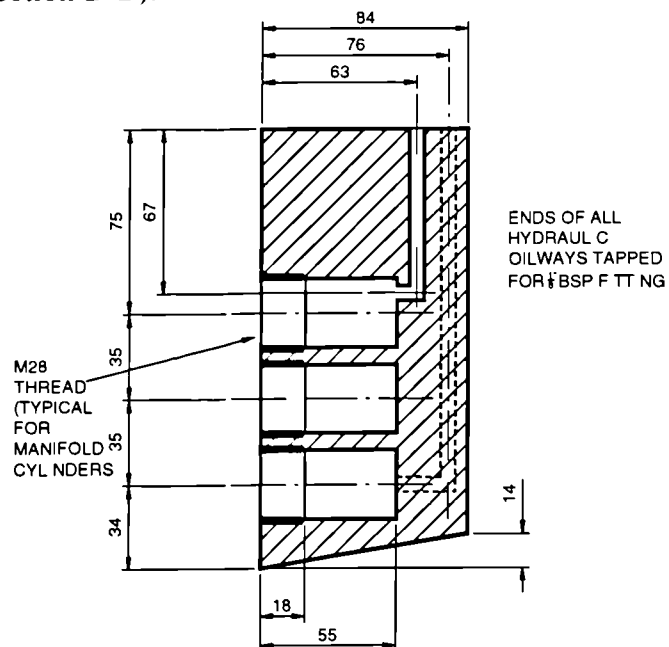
Section A-A through manifold unit showing hydraulic oilways. For location see Figure 3.6.
